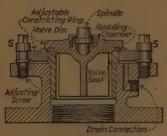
Details of a springloaded safety-valve disc and constricting ring. (American Steam Gage & Valve Mfg. Co.)
